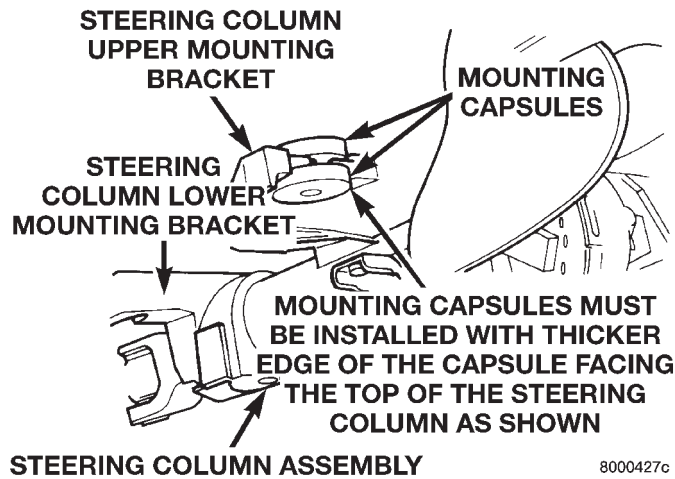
Mounting Capsules Correctly Installed On Steering Column
